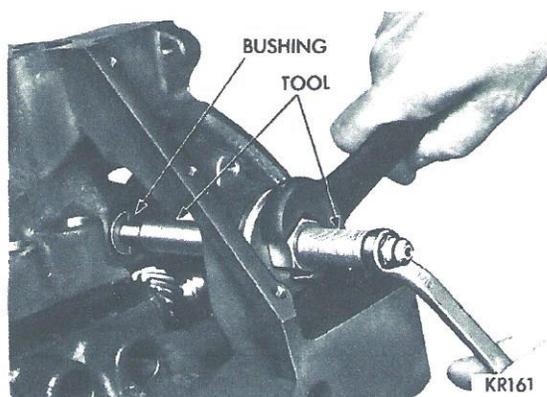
Burnishing Distributor Drive Shaft Bushing
